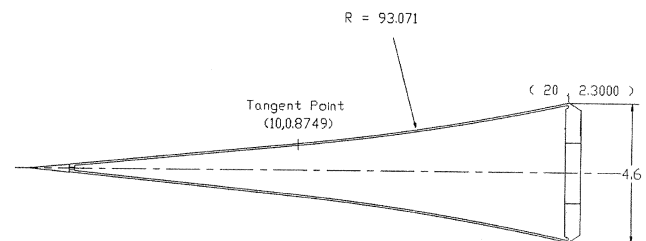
Cone-flare 93-10 model and dimensions, from Ref. 7; dimensions in inches.
